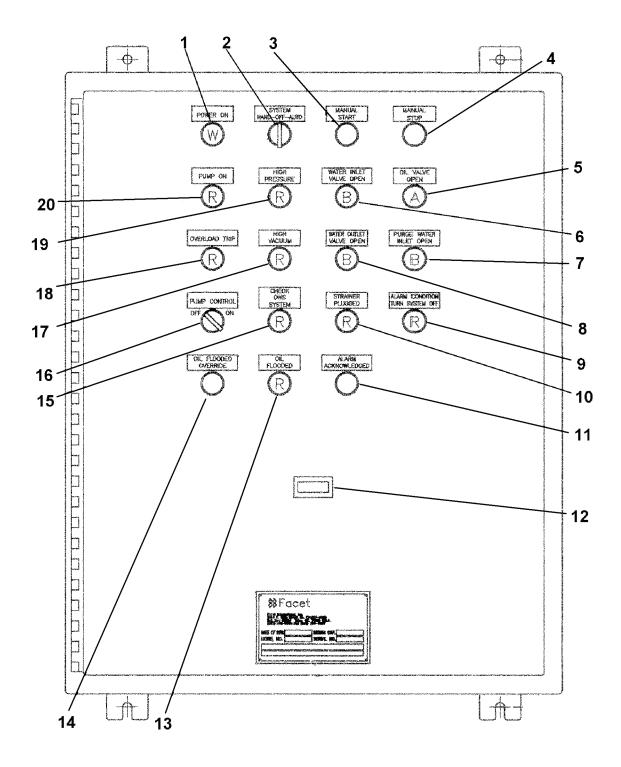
OWS Control Panel Assembly Controls and Indicators.
